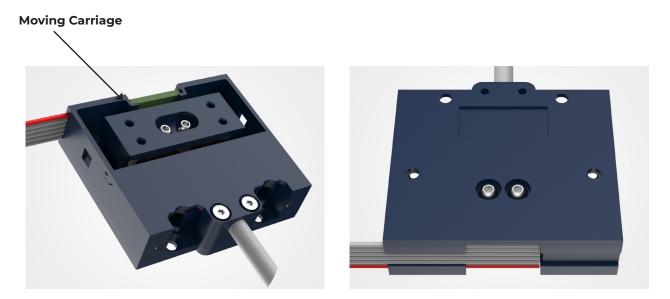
LBS004-E Series motors with factory installed encoder (front & back)
